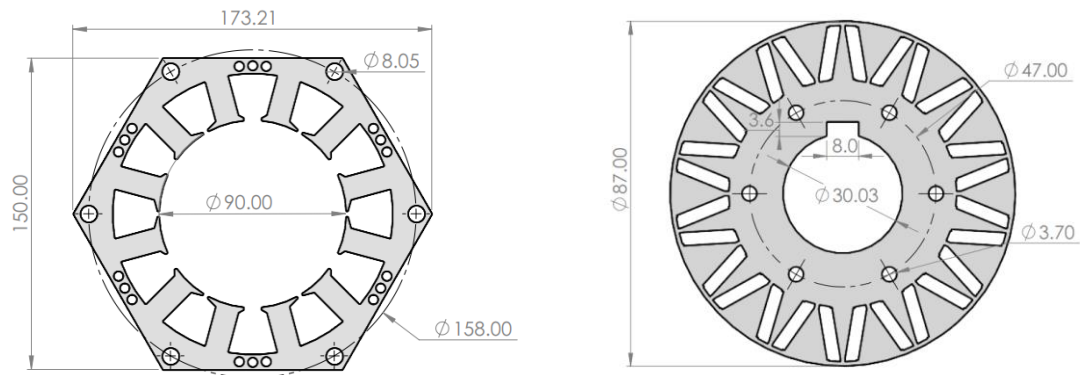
Dimensional constraints in mm for low-power demonstrator: stator (left) and rotor (right).
